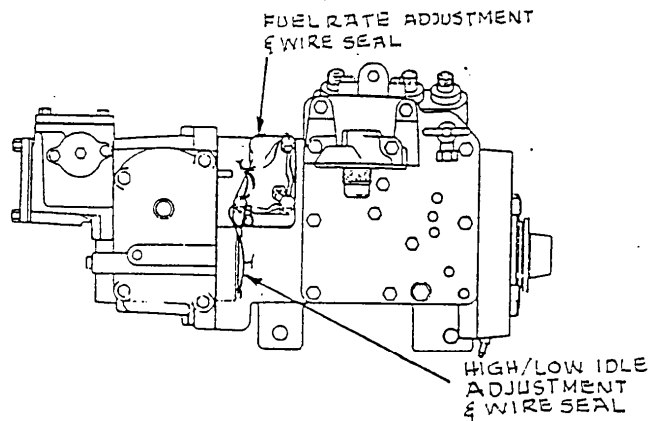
SEALED ENGINE ADJUSTMENTS
